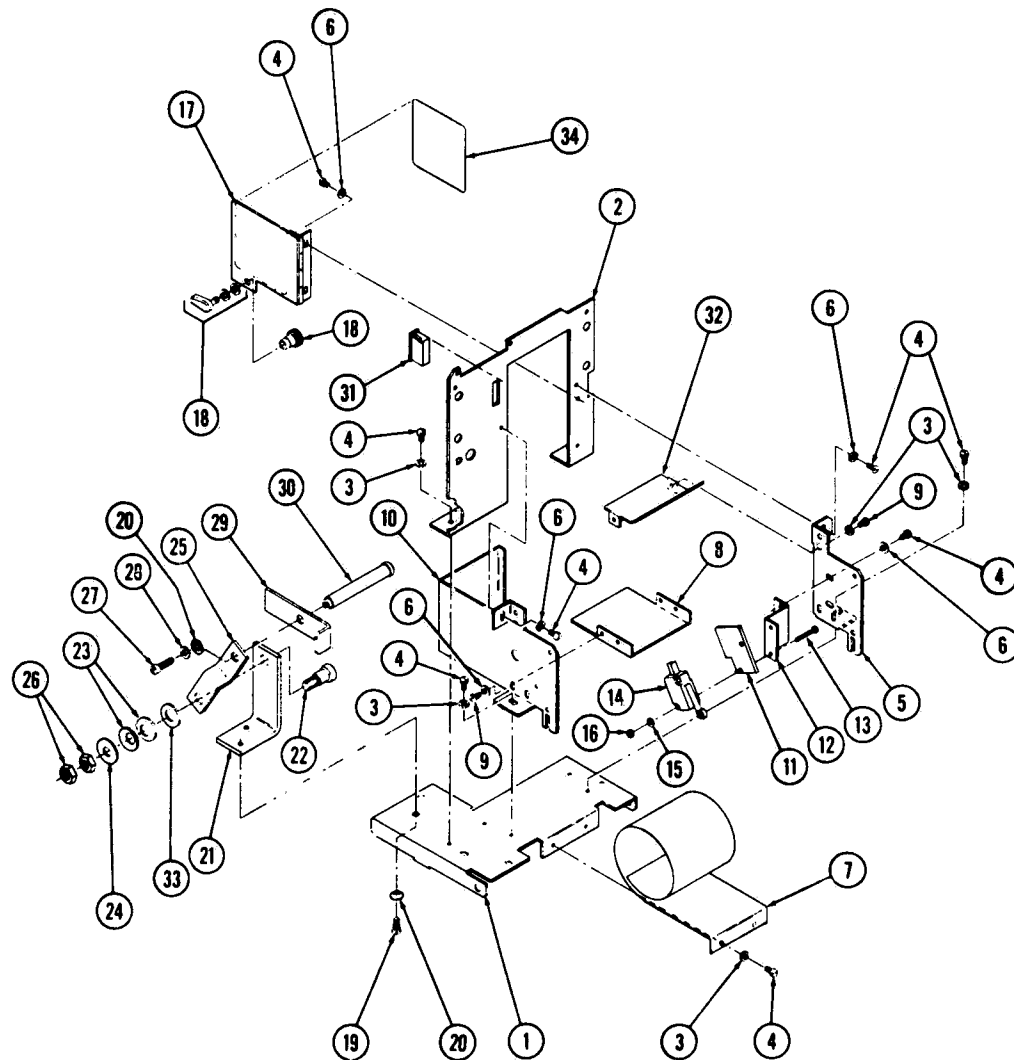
PRINTCON PRINTER ASSEMBLY (Part 2 of 2, Units Before 6/85).
